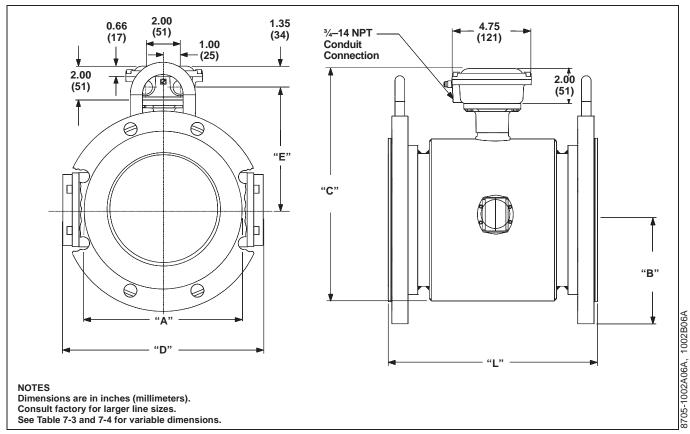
Dimensional Drawing of Model 8705 Flowtubes, Typical of 6- through 36-inch (150-900 mm) Line Sizes.
